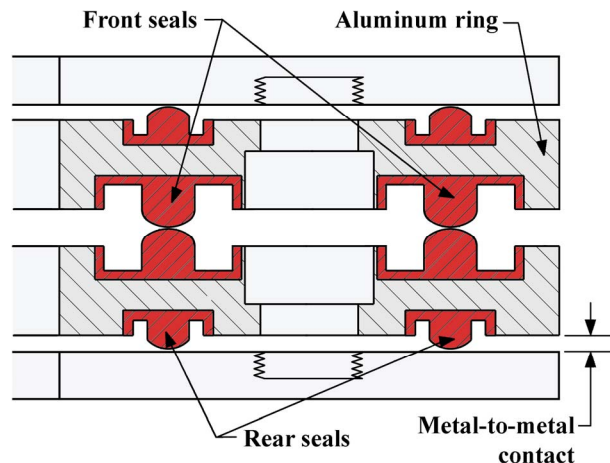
Illustration of the cross-section of 12"EDU54 test specimens configured in an elastomer seal-on-elastomer seal assembly.
